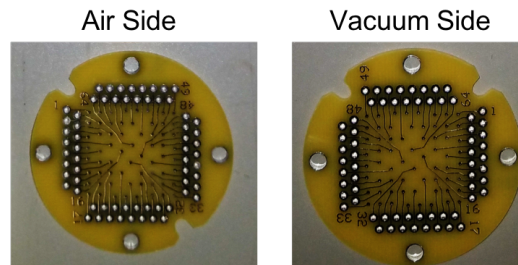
Non-magnetic feedthrough PC board. The left side panel shows the PCB "A" component and the right side panel shows the PCB "C" component from Fig.5.35.
